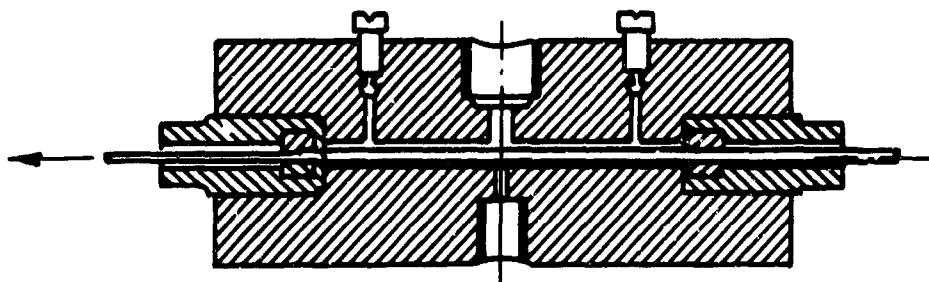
Section of pressure chamber for promotion of thick film lubrication in wire drawing [92].
